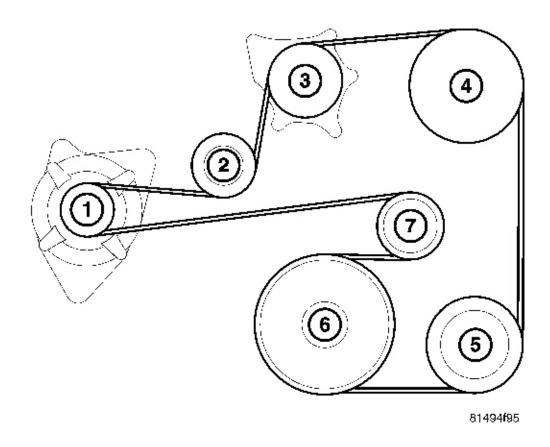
Accessory Drive Belt Routing Courtesy of CHRYSLER LLC
